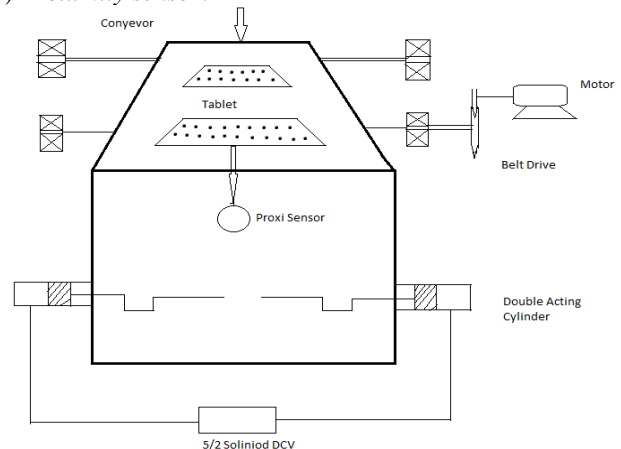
Schematic Diagram of Tablet strips Counter and Shifter Machine
